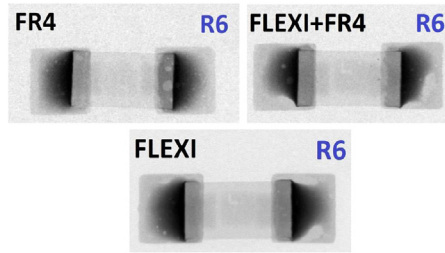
X-ray analysis of VPS soldered 0603 joints with minor differences in wetting, voiding and alignment on FR4, Flexible and Flexible PCBs supported with FR4 fixture.
